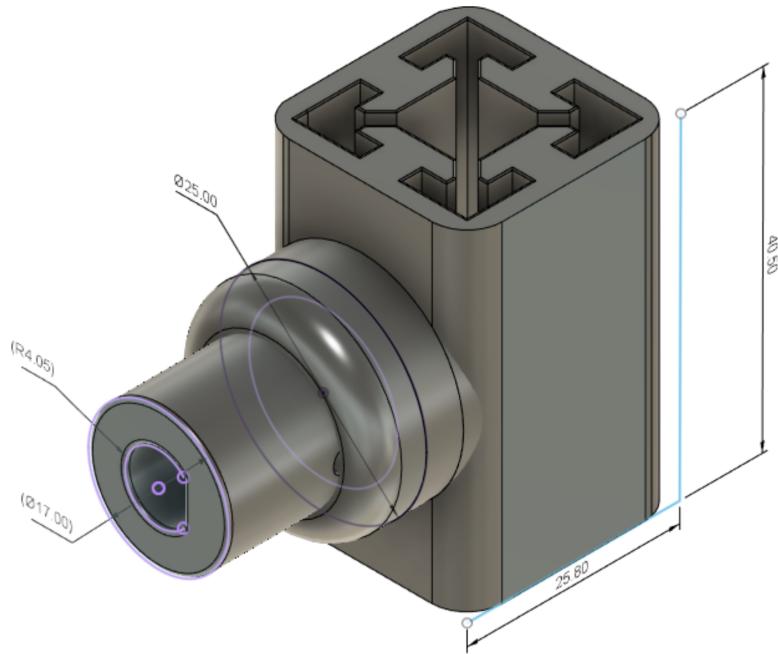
Motor Shaft to Aluminum Extrusion Arm Connector (Units in mm)
